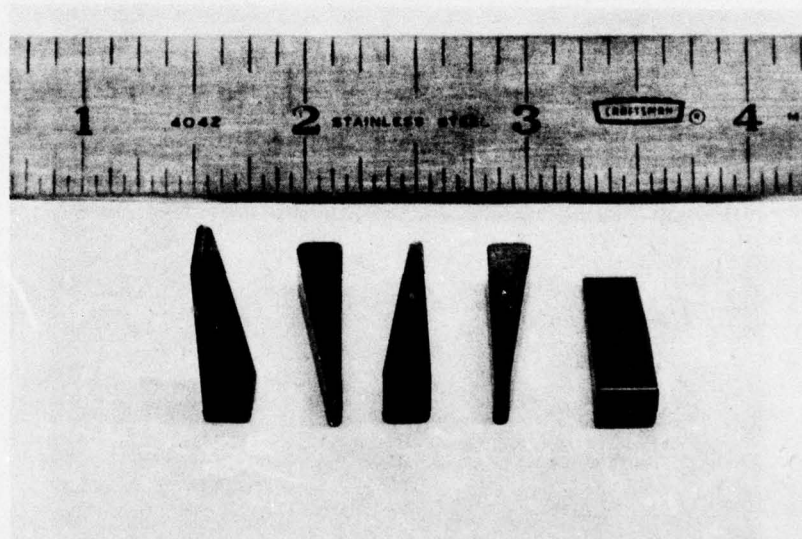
HPSi_3N_4 (NC-132) NOZZLE VANE TRAILING EDGE SECTIONS (Per Drawing DSK-14958)
